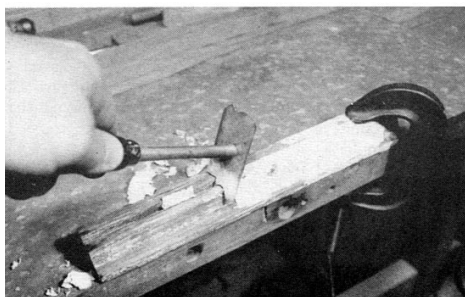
Lowering and raising the handle controls the cutting edge of the blade.
